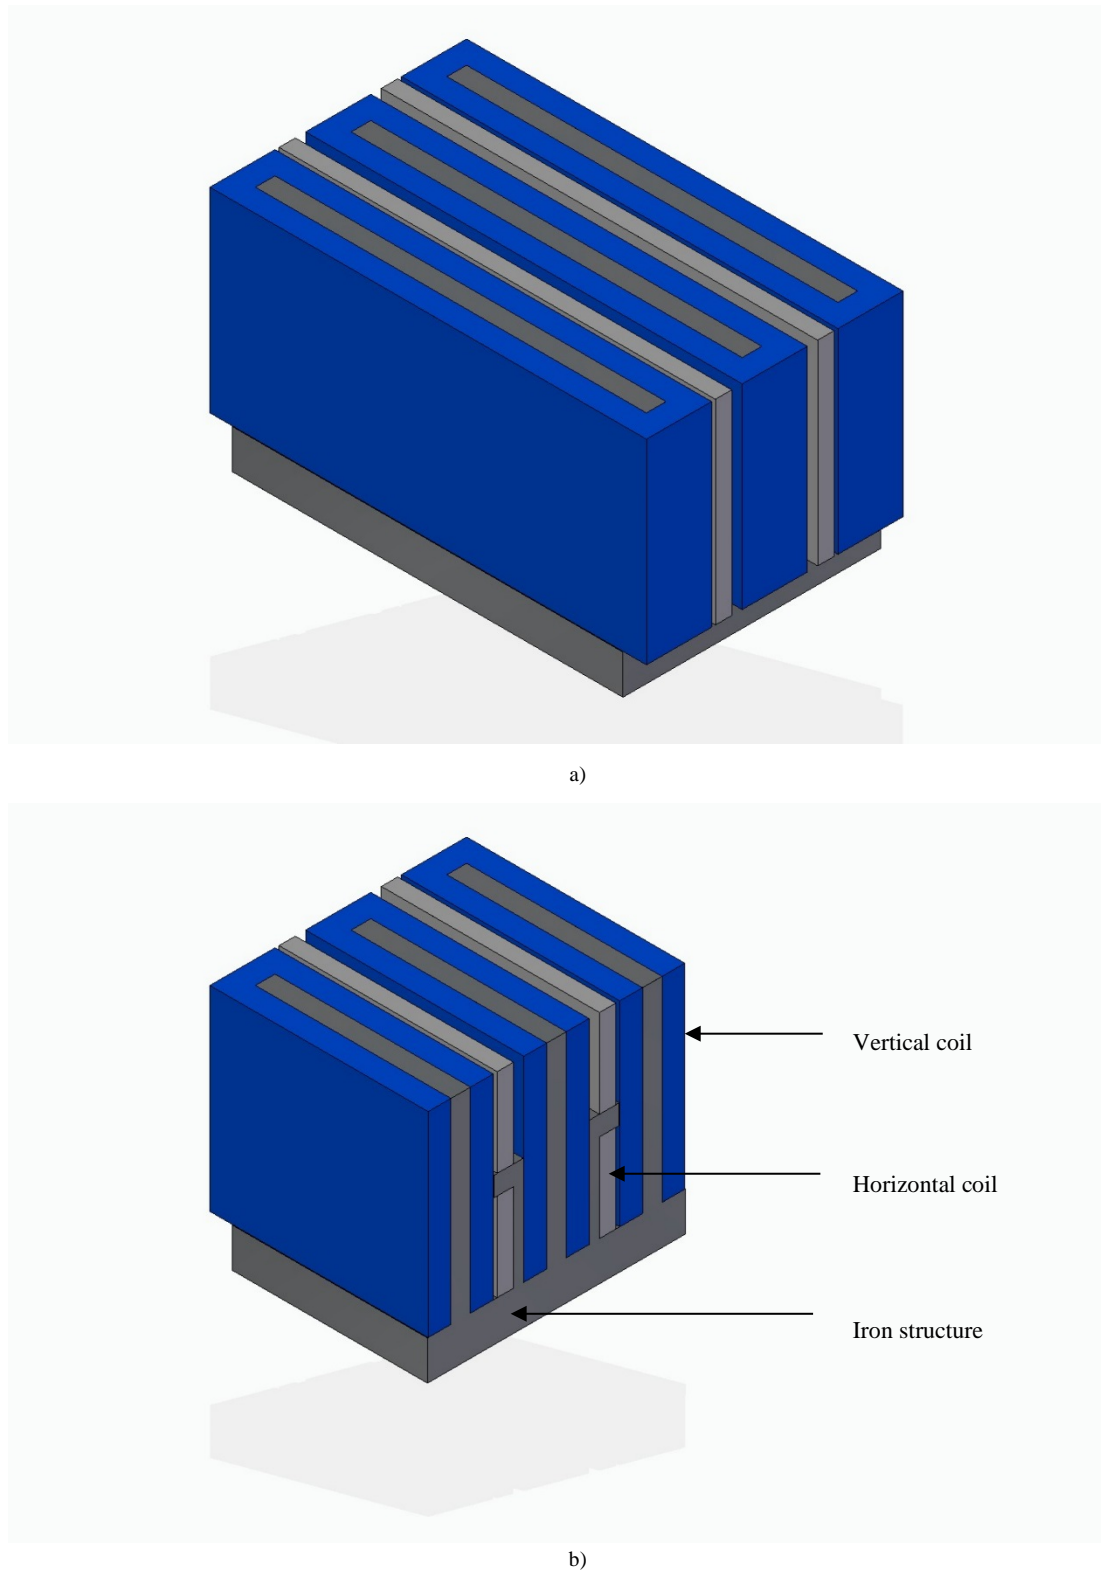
Proposed Iron structure holding the optimised Iron-Cored Halbach array. A) Isometric view; b) cutaway view and details
